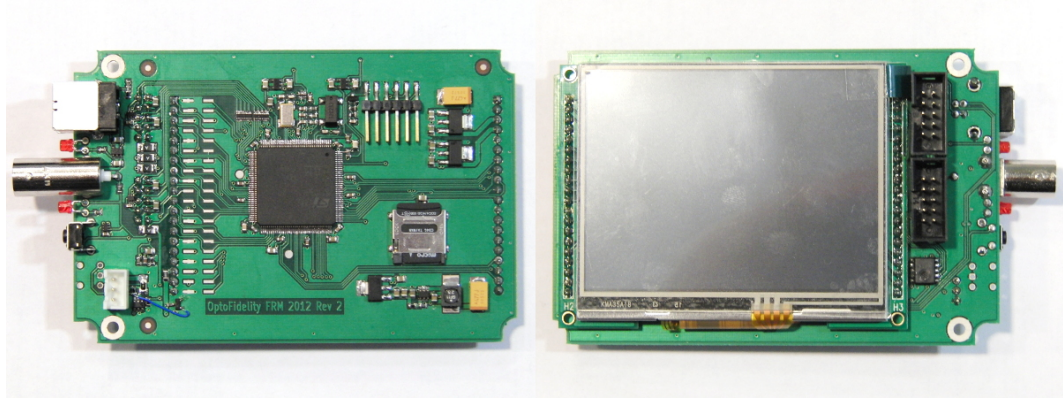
A hand-soldered prototype version of the main circuit board of the device.
